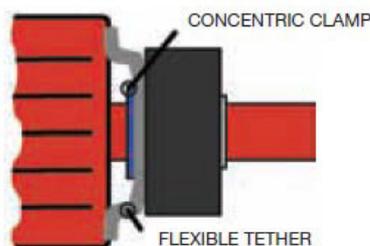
A hollow-shaft encoder can be directly mounted on the motor or driven shaft
